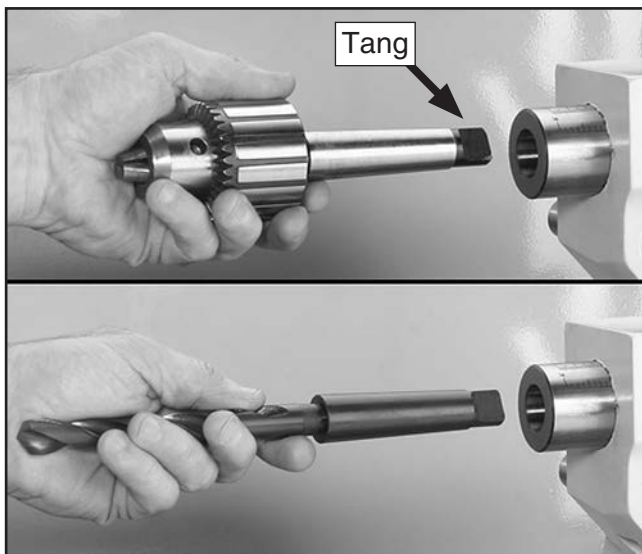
Typical drill chuck and arbor-style drill bit installation.
